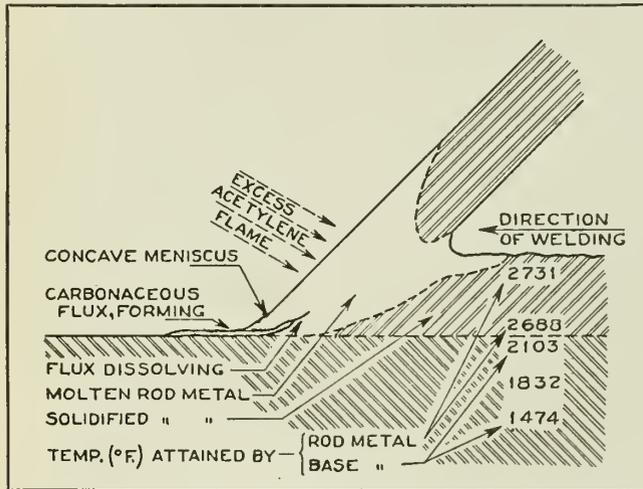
Diagrammatic Sketch showing important points regarding Excess-acetylene Welding.
